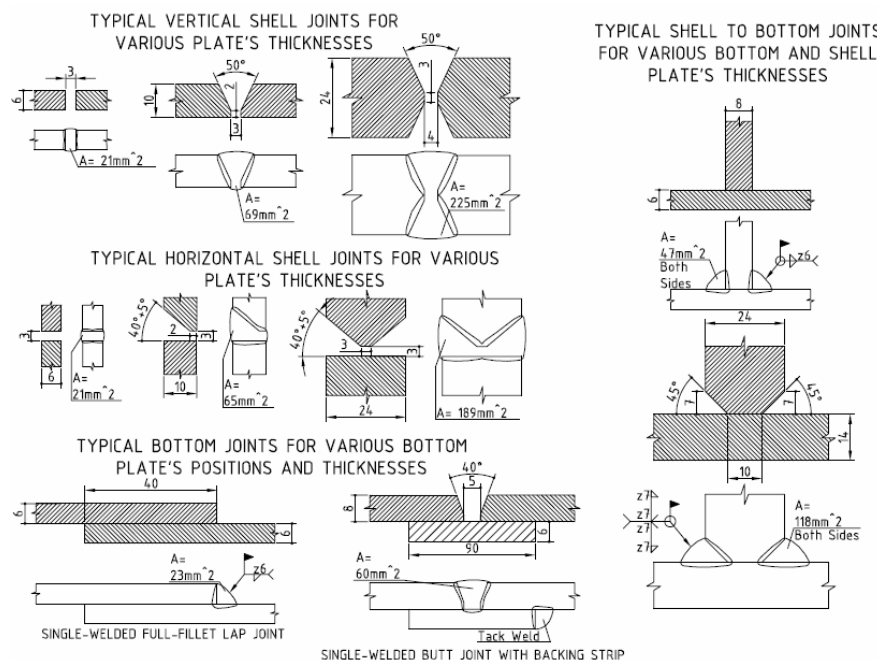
Typical weld joints of oil storage tank according to various material thicknesses - API 650 and good engineering practice [1,2,3]
